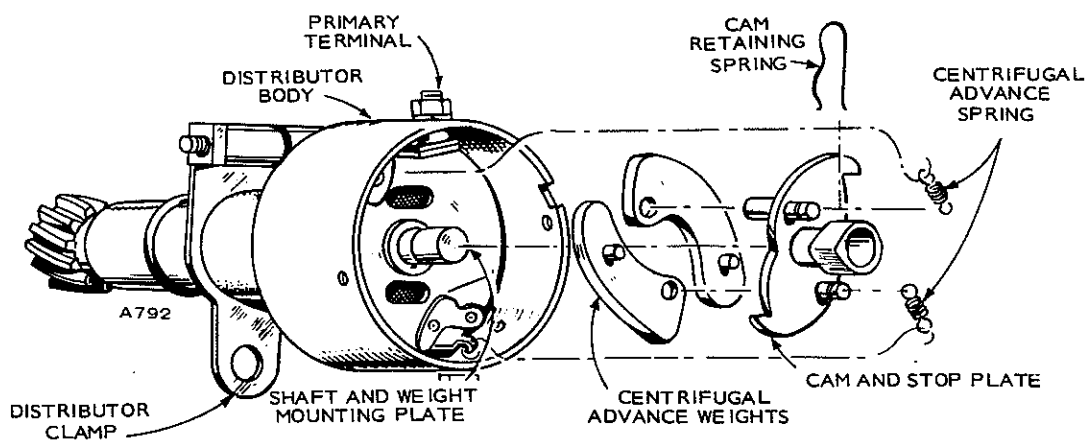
DISTRIBUTOR DISASSEMBLY
